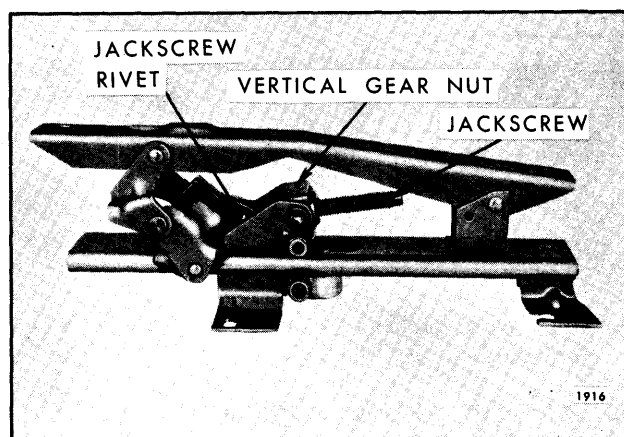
Four-Way Seat Adjuster - "A" Styles
